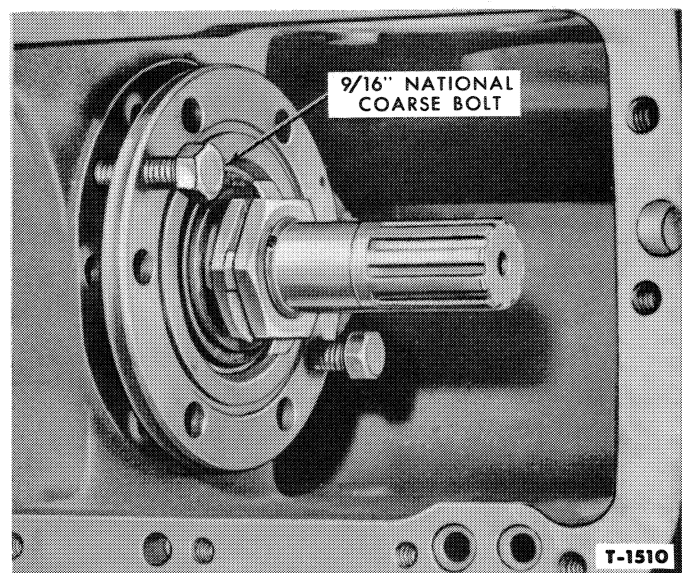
Removing Pinion Gear Retainer and Shaft Assembly
